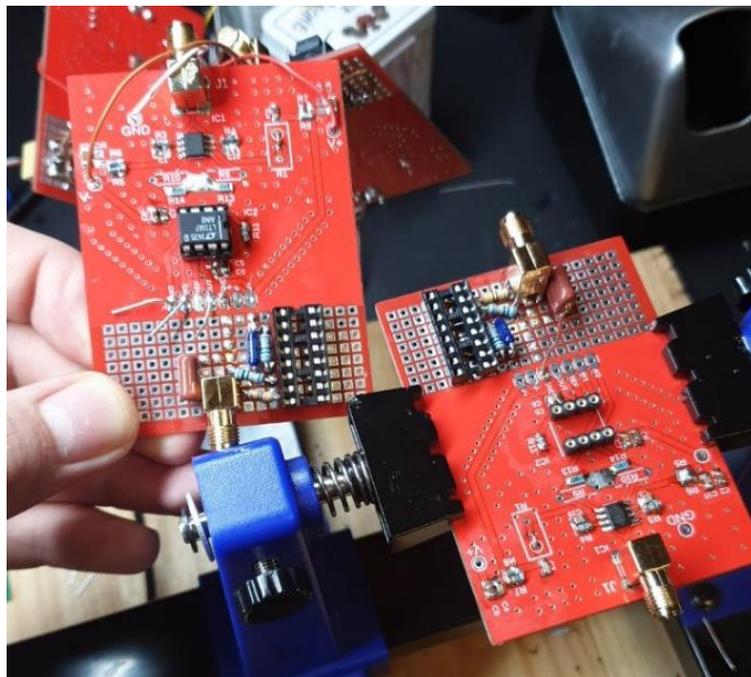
multiplier PCBs with DC Compensator assembled in prototyping area
